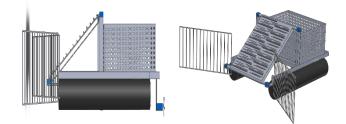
Left Side View of Model Fig 2.Isometric View of Model
